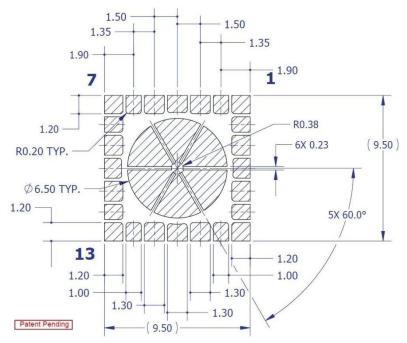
Recommended solder pad layout for anode, cathode, and thermal pad.
